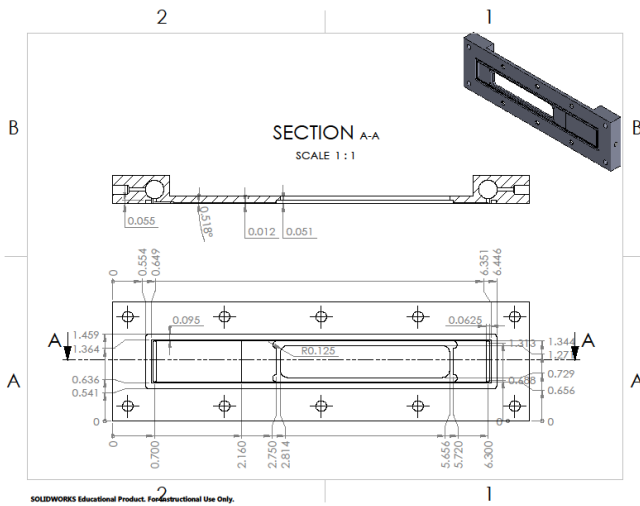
Solidworks Drawing of Top Plate: Side and Bottom View.
